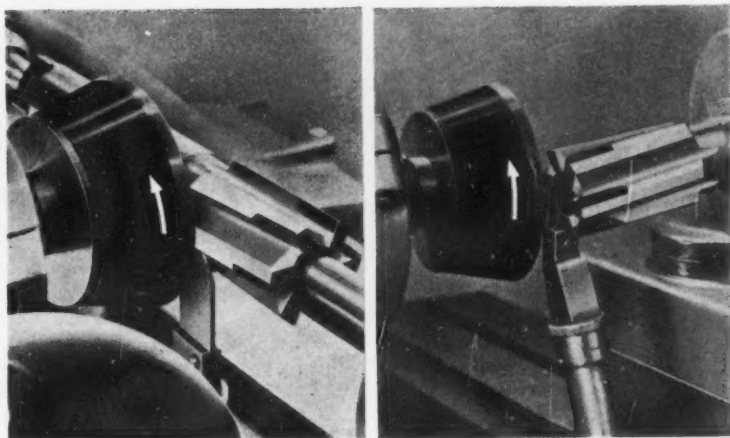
(left) Spiral End Mill Mounted Between Centres on a Tool and Cutter Grinder
